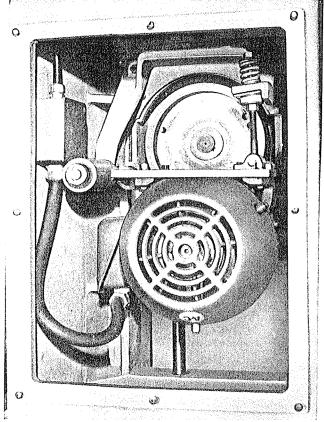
Rear view of upright compartment, showing motor and Oriflex drive.
